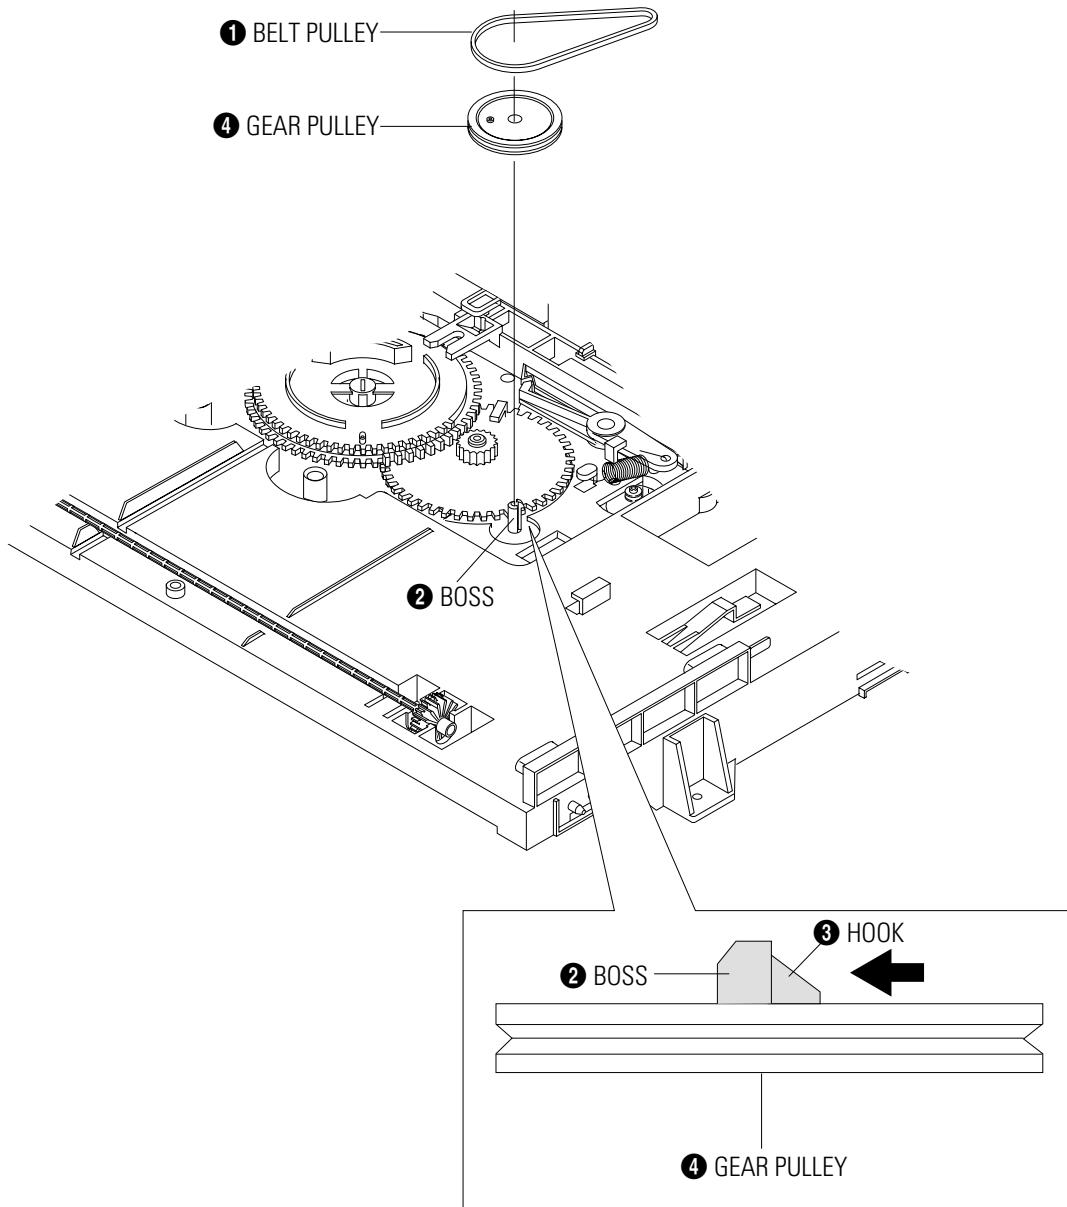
Belt Pulley, Gear Pulley Removal
